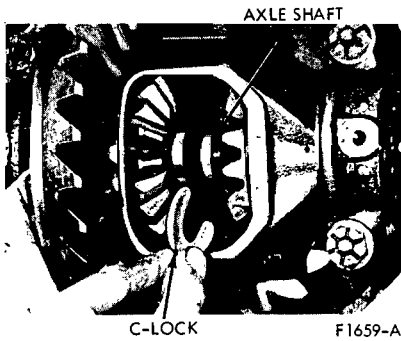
Removal and Installation of C-Locks and Axle Shaft
